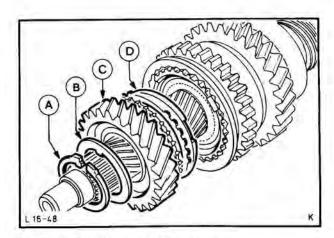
Remove circlip, pull off 2nd gear C – 2nd gear D – Synchroniser ring A - Circlip B - Thrust washer
